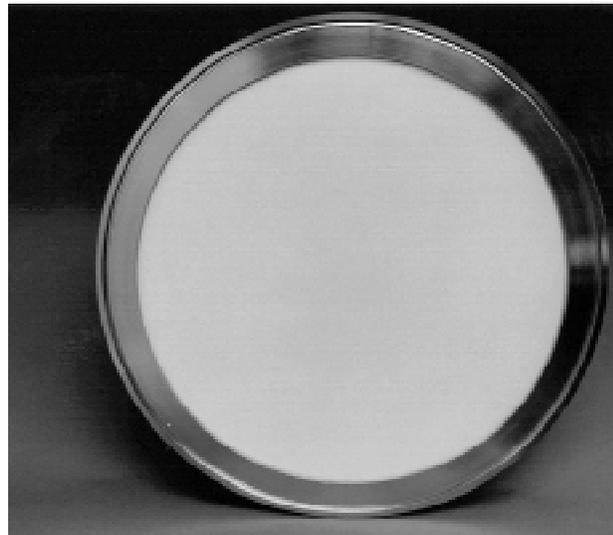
Ceramic disk with brazed stainless steel compression ring and post-machined knife-edge seal.
